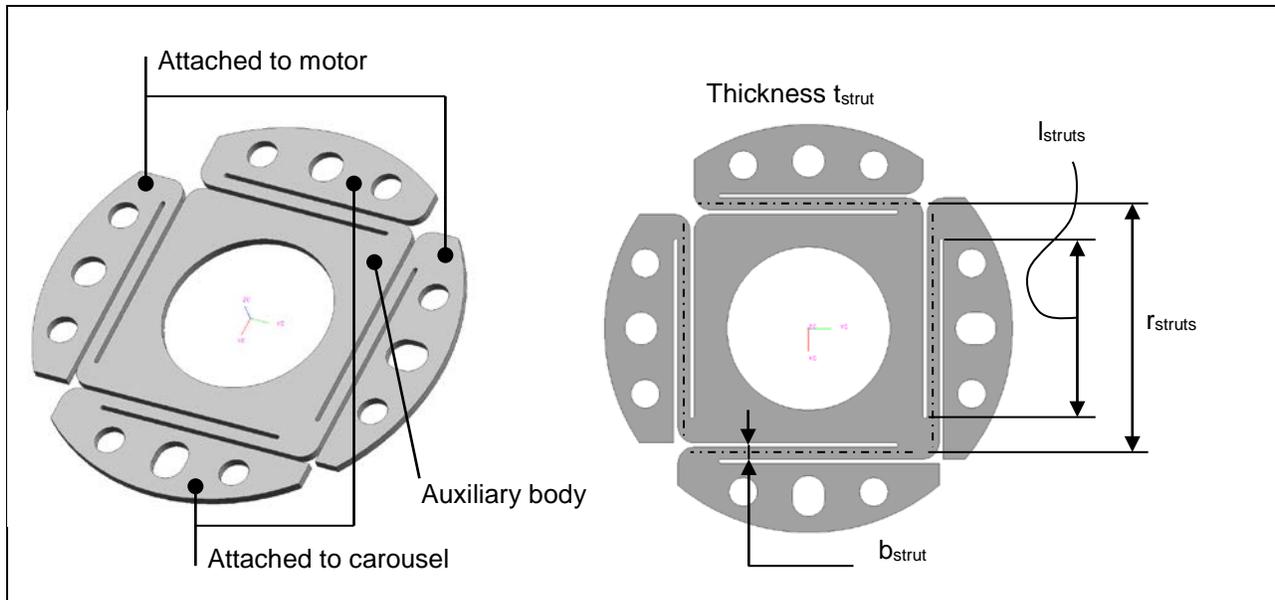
Flexible coupling used to couple the drive shaft of the motor to the rotor
